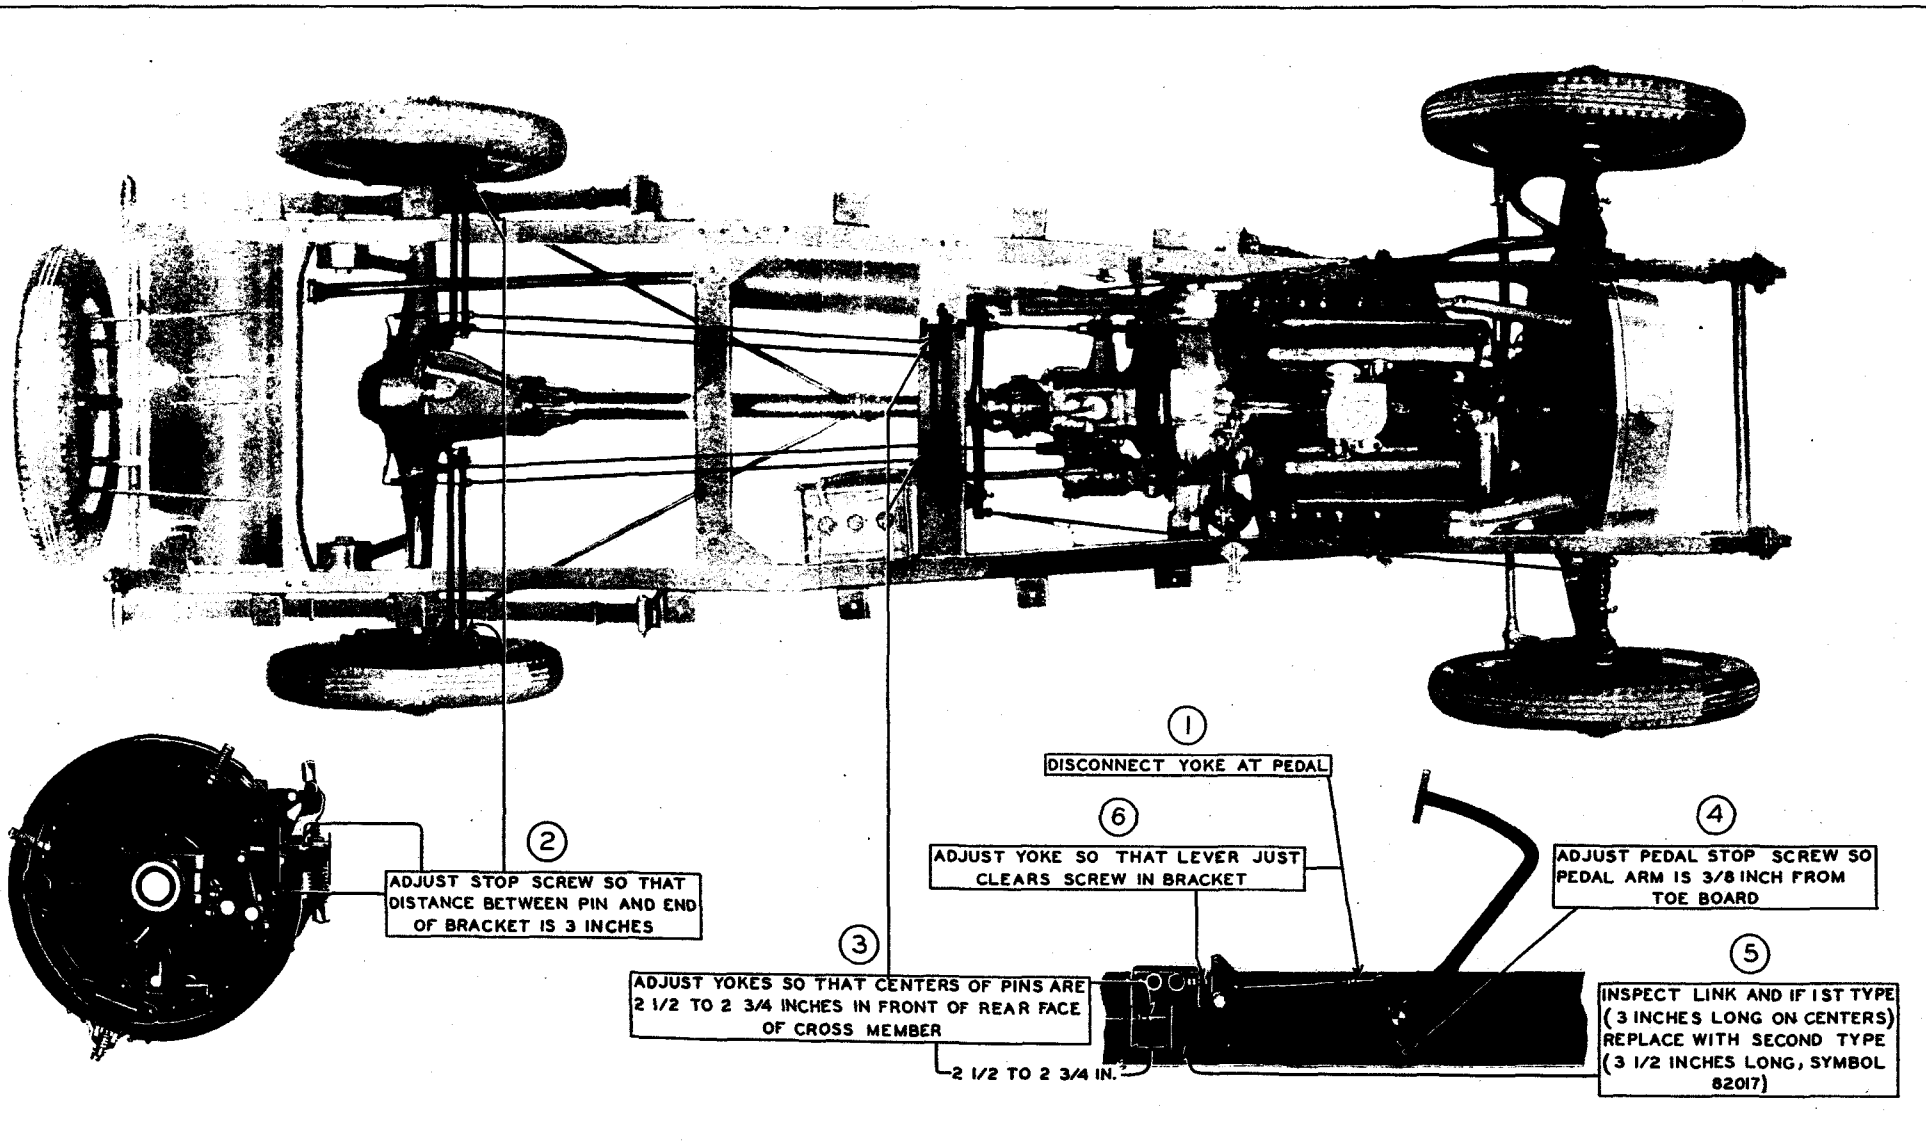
Adjustment of Brake Connections. (Follow with adjustment of brake bands, Figs. 117 and 118)
